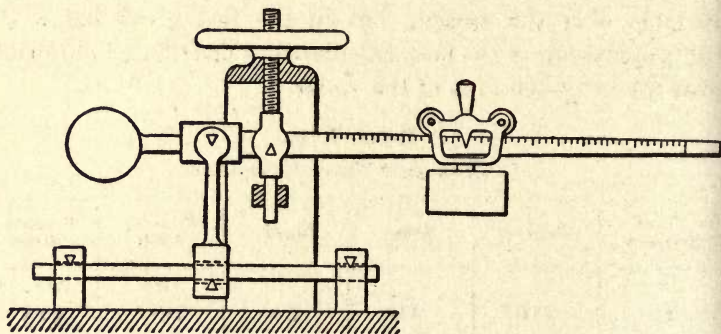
Small Beam Testing Machine for Cast Iron.
